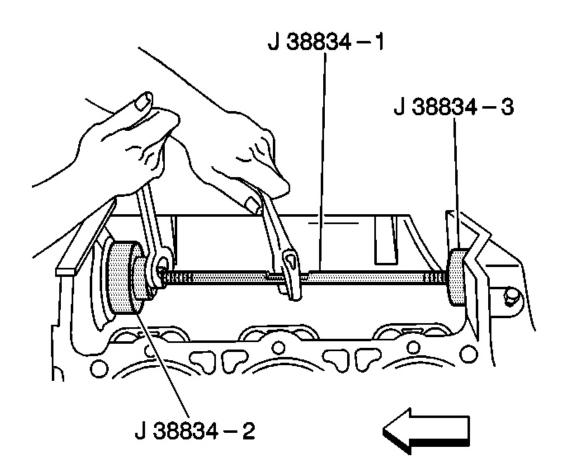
Installing Balance Shaft Rear Bearing Courtesy of GENERAL MOTORS CORP.
